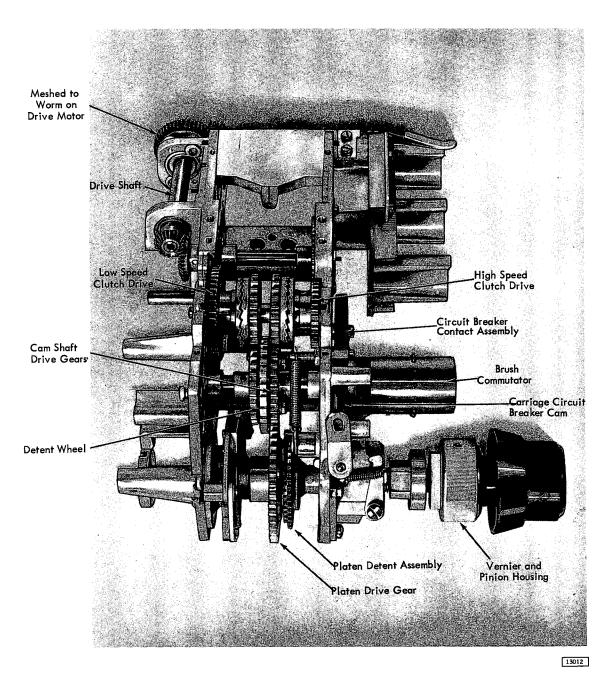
Carriage Drive Unit (Removed from Carriage)
